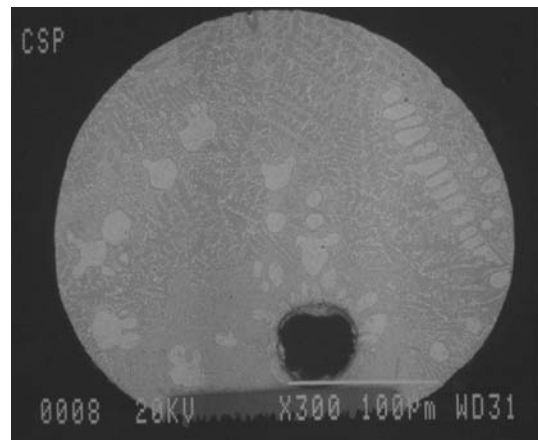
SEM of cross-section of CSP solder bump manufactured with 63Sn/37Pb solder paste via the print-detach-reflow process [23]
